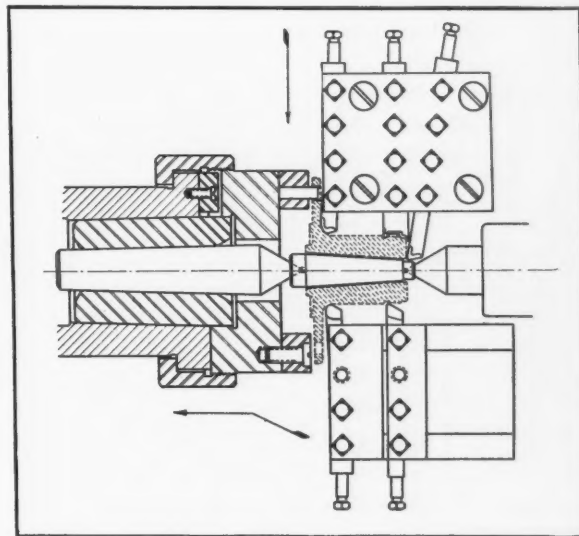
Finishing Operation on the Rear Hub which is also performed in a Fay Automatic Lathe
